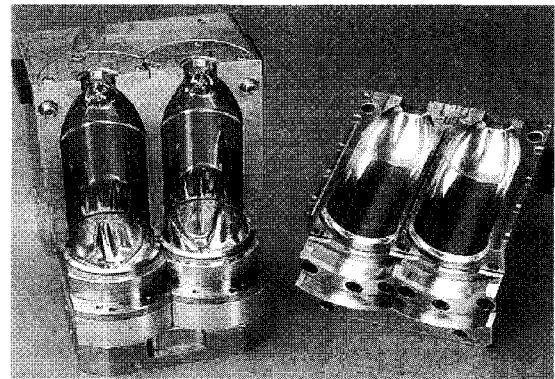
Mold for injection stretch blow molding for carbonated soft drinks
